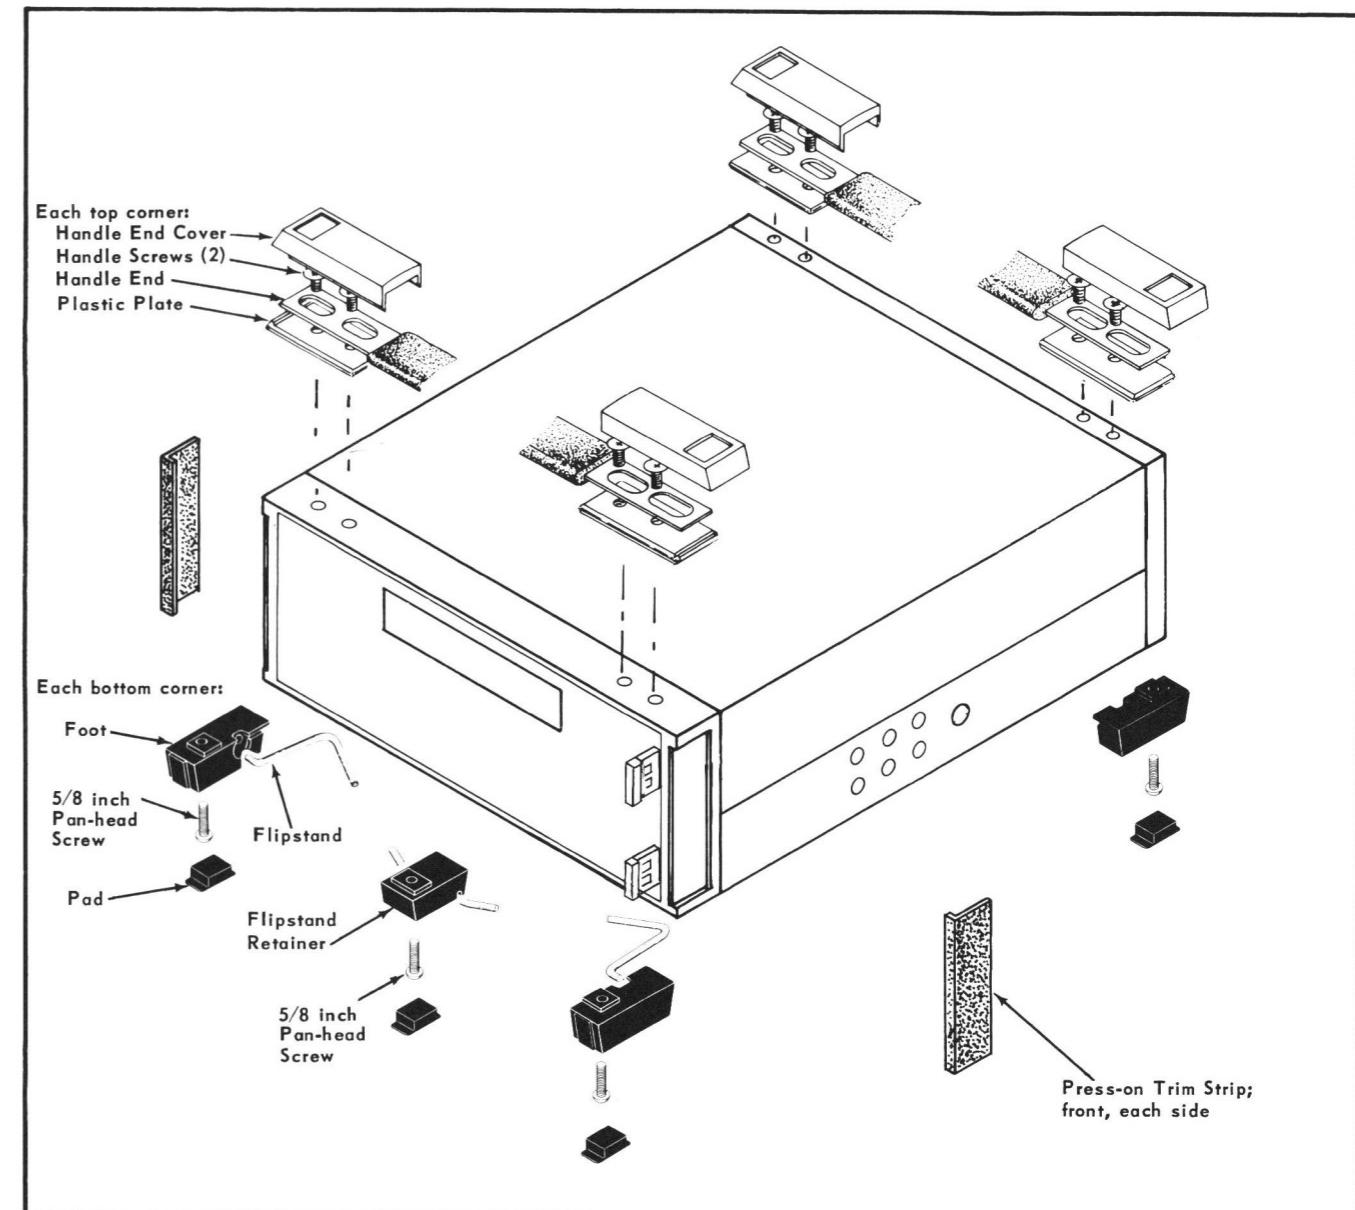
Parts peculiar to the bench-mount instrument (Type 250).
